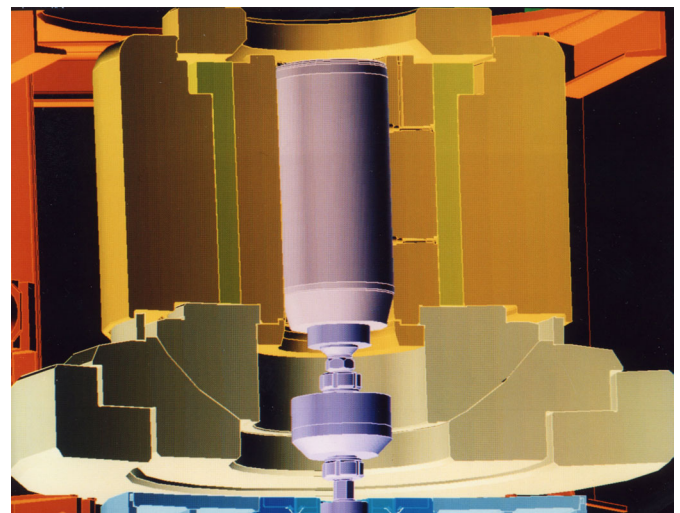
Air-bearing unit with cylindrical air bearing, spherical air bearing and horizontal air bearing.
